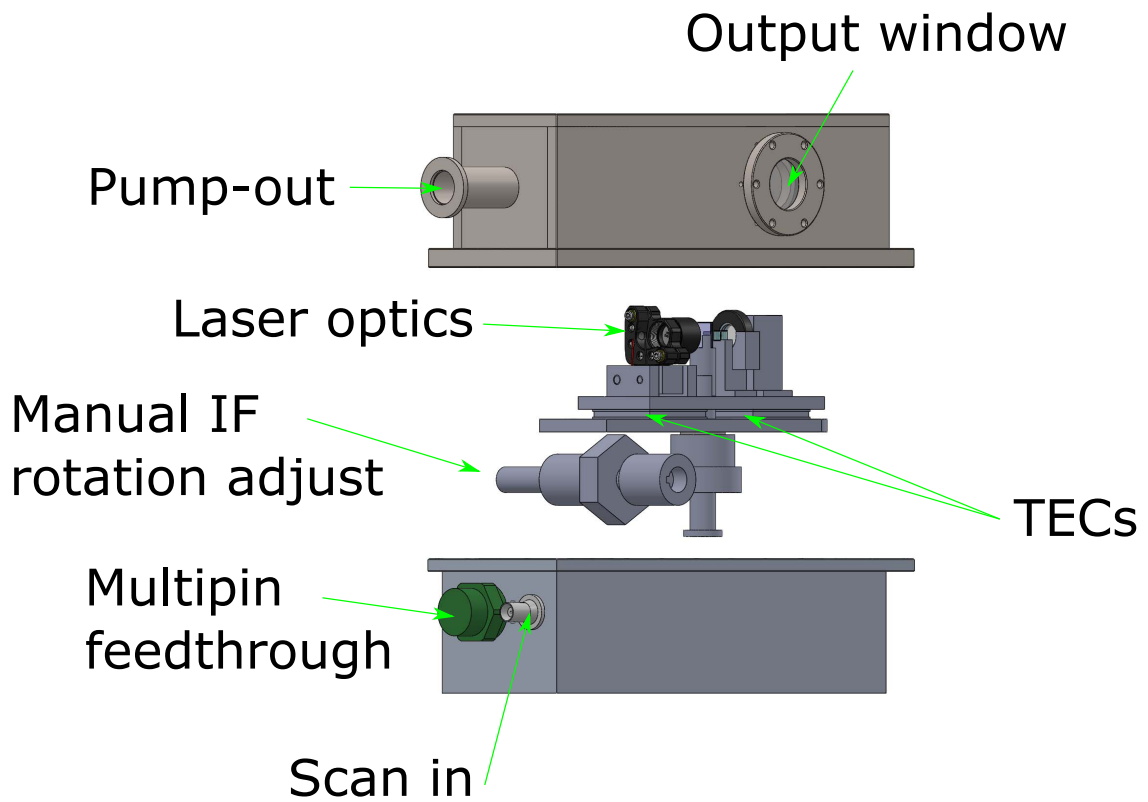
Exploded view of CAD model of laser. The top and bottom of the case are joined together with an elastomer o-ring seal, and all electrical/mechanical feedthroughs are vacuum rated. The output window is AR coated and wedged by 30 arcminutes, to eliminate unwanted optical feedback into the diode from the window. The IF angle inside the cavity is controlled by a simple gear linkage with 100:1 reduction ratio to improve manual tunability. The pump-out port is a standard vacuum flange (KF16) which easily interfaces with common vacuum pumps.
